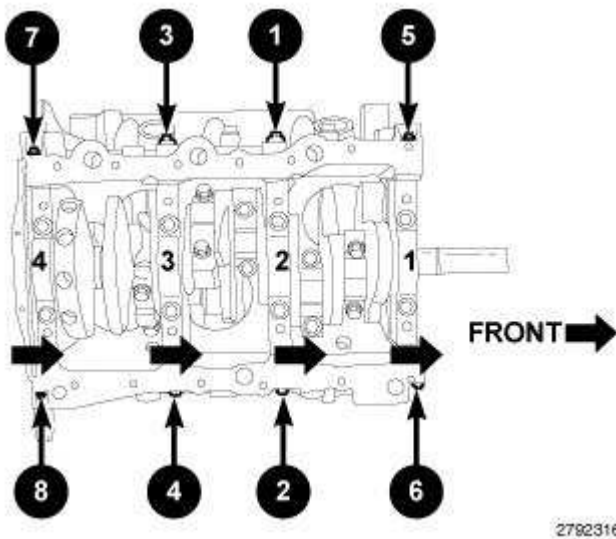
Main Bearing Tie Bolts Installation Sequence
